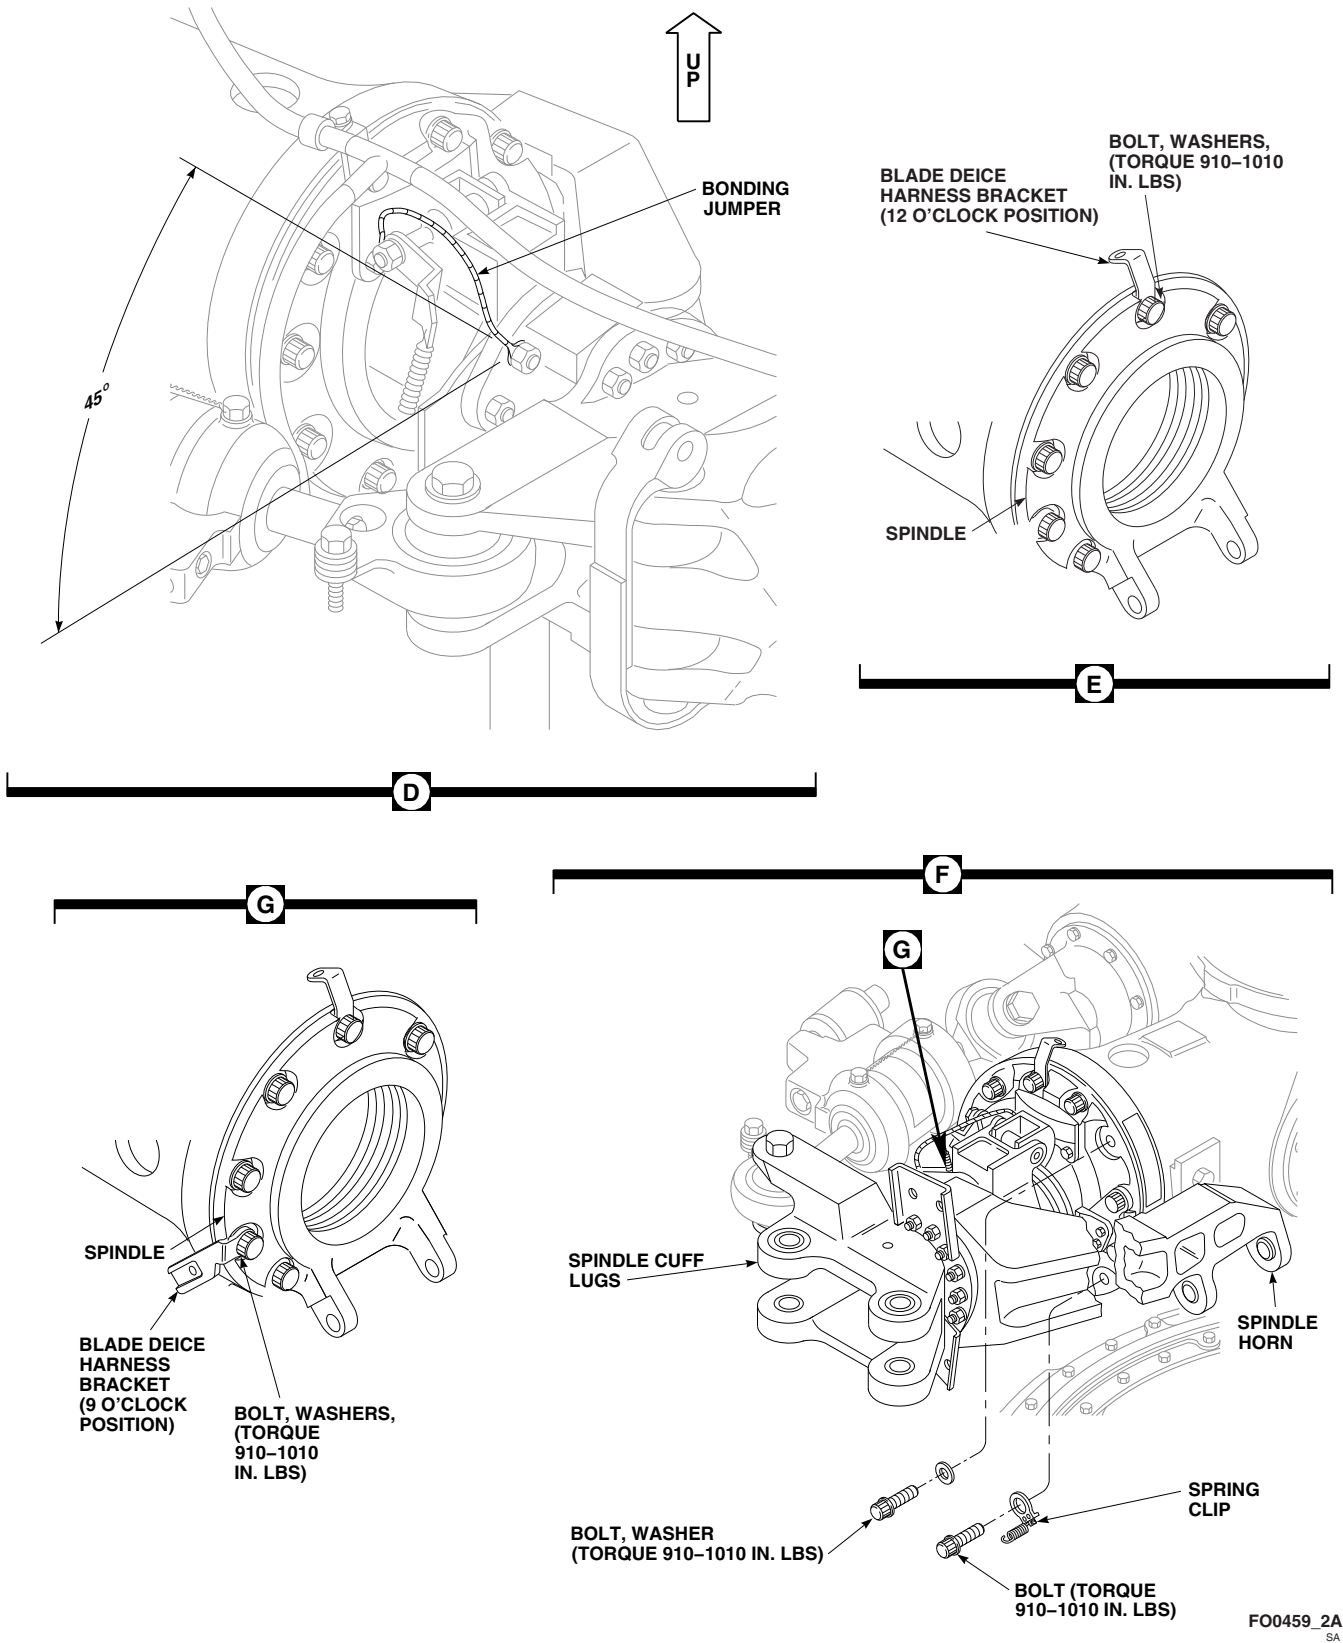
INSTALL SPINDLE (SHEET 2 OF 2)
